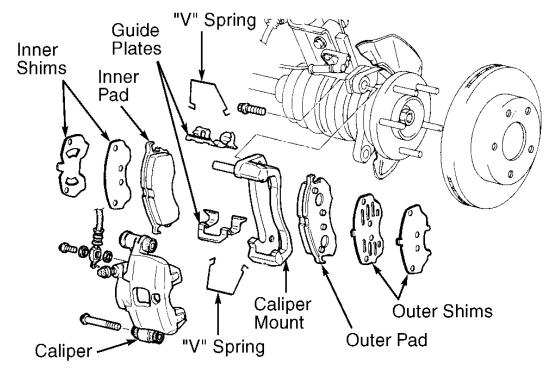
Exploded View Of Front Disc Brake Assembly (Miata Shown; MPV Is Similar) Courtesy of MAZDA MOTORS CORP.
